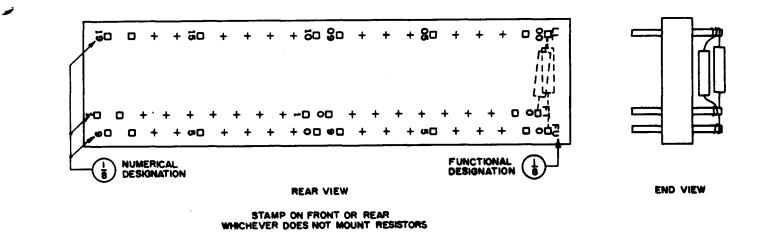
Terminal Strips—260 Type for Mounting Pigtail Components
